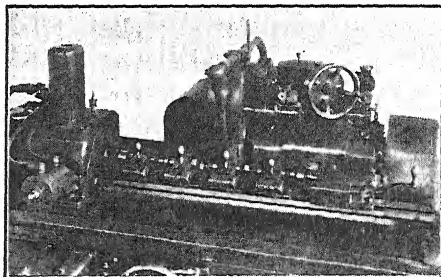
A Close-Up View of the Landis Camshaft Grinder.
